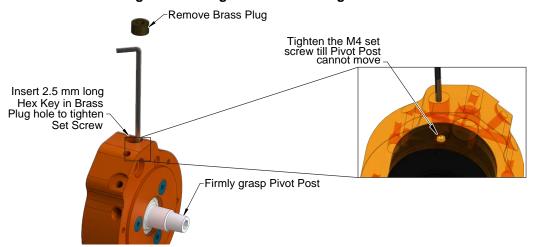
Air cap alignment in Rear Housing Assembly.
